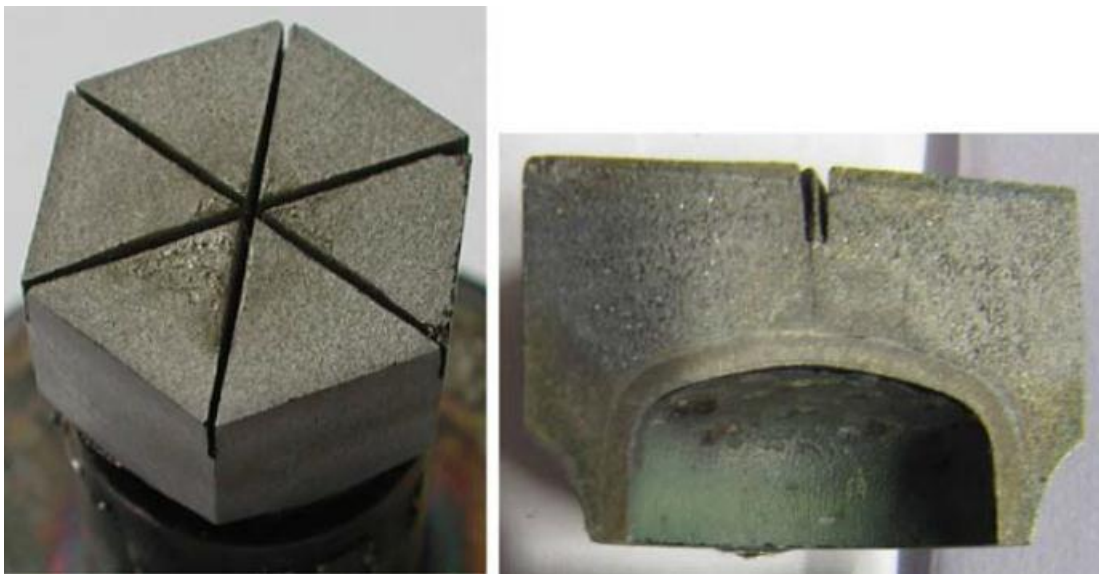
Crack in helium cooled divertor finger module during high heat flux testing [9]
